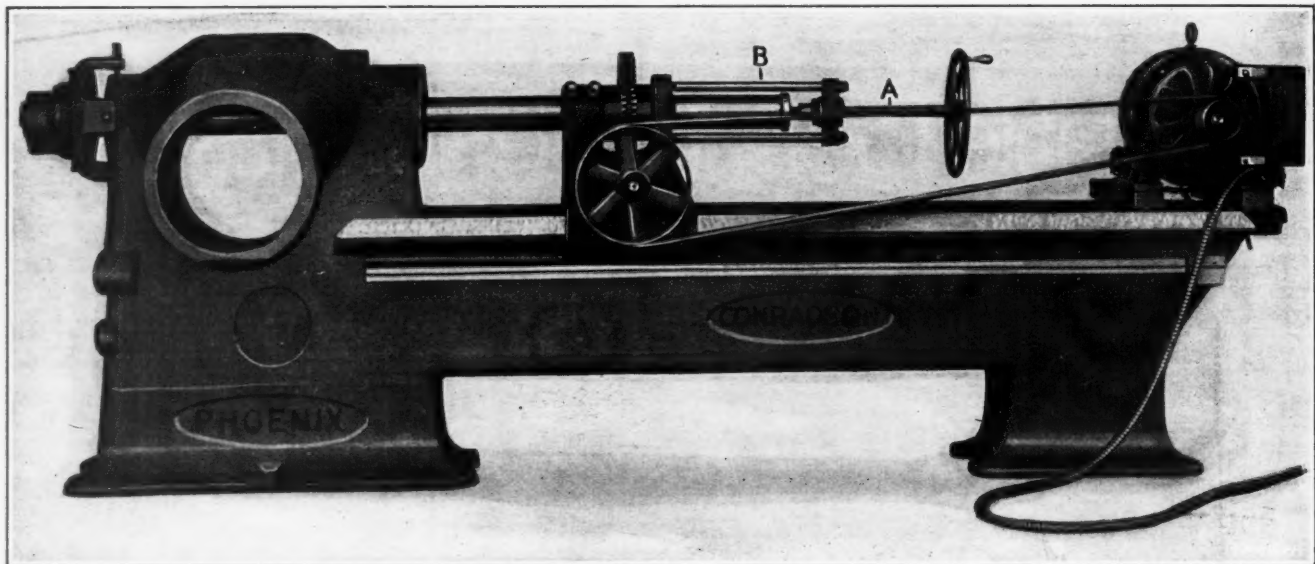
Portable Boring-bar Equipment for boring and facing Spindle Bearings in Headstock
